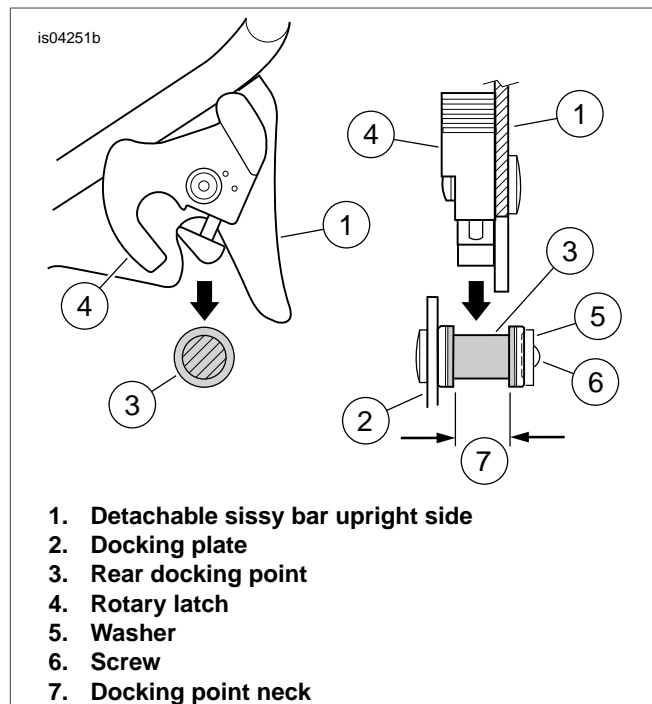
Proper Alignment of Latch in Rear Docking Point, Views in Direction of Arrows (D) and (E)
